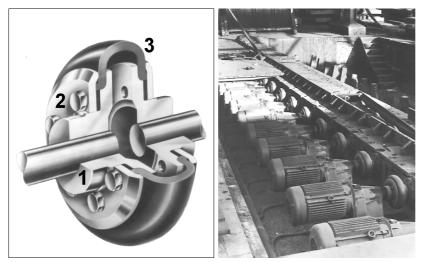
Highly resilient zero-play coupling comprising a hub (1), thrust piece (2) and rubber shaft tyre (3) with fabric inlay (PERIFLEX system, manufactured by STROMAG)
